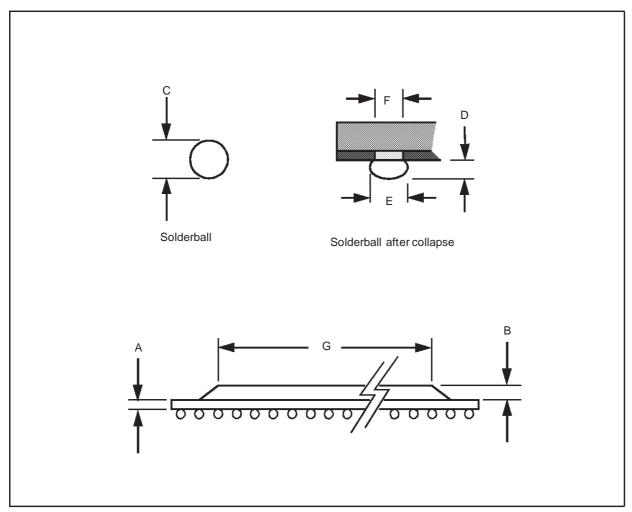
516-pin PBGA Package - PCB Dimensions
